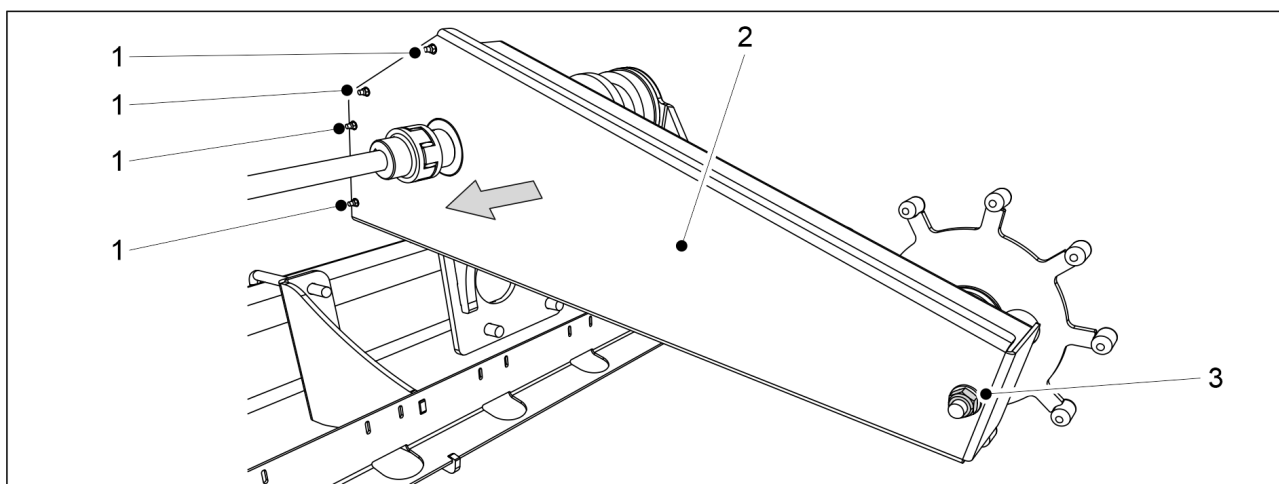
227. Cover of the wheel drive housing
